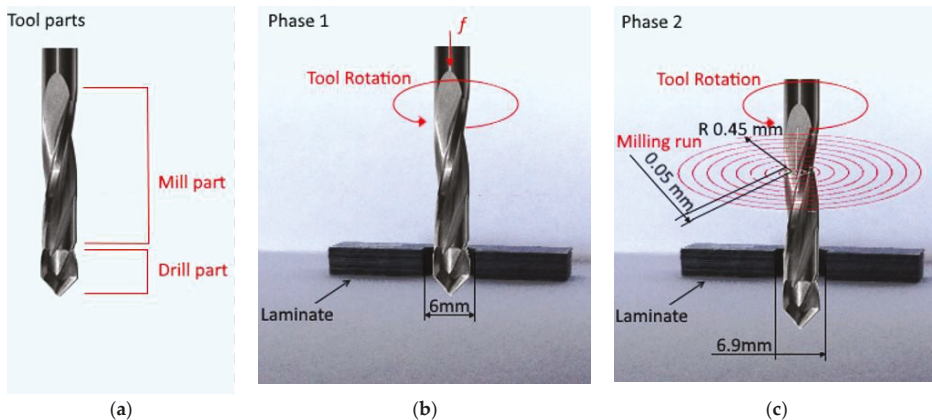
Representation of the following (a) tool parts and process phases; (b) drilling and (c) milling.
